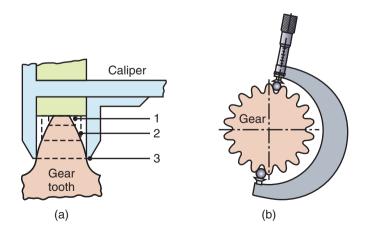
Measuring gear-tooth thickness and profile with (a) a gear-tooth caliper and (b) pins or balls and a micrometer.
